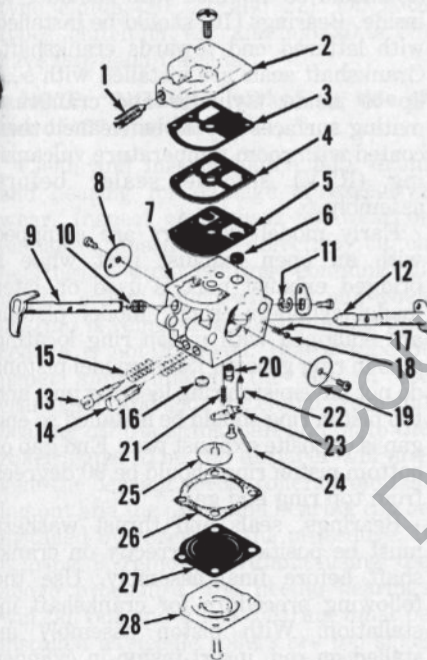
Exploded view of Zama C-1S-H4 carburetor. Zama C-1S-H8 carburetor is similar.
